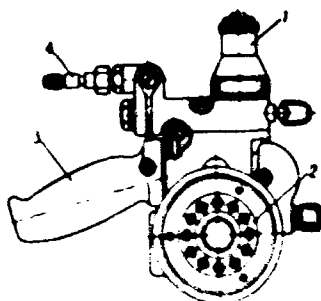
Gas metallizer: 1) Dispersion head; 2) compressed-air turbine; 3) handle; 4) connecting tube for compressed-air supply.
